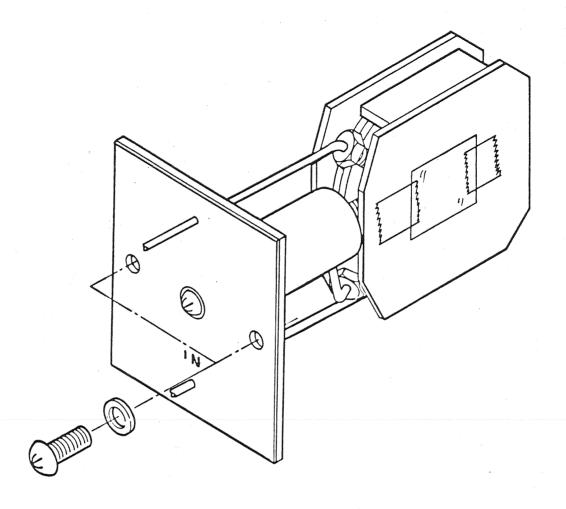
Sticking a piece of Paper on Cell Hole
